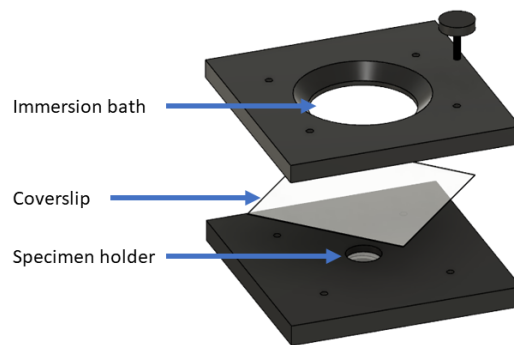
Computer-aided design drawing of the disassembled specimen holder and multipart chamber for long-term imaging of whole mounts of tonsil tissue using water immersion. The top and bottom sections correspond to the immersion chamber. The top plate includes a 38 mm diameter ‘O’ ring (not shown) that was brought into contact with the large coverslip. Screws (only one shown, though four were used in practice) brought the three sections together. Distilled water was added to the bath created by the contact of the top plate and coverslip of the specimen slide for long-term imaging.
